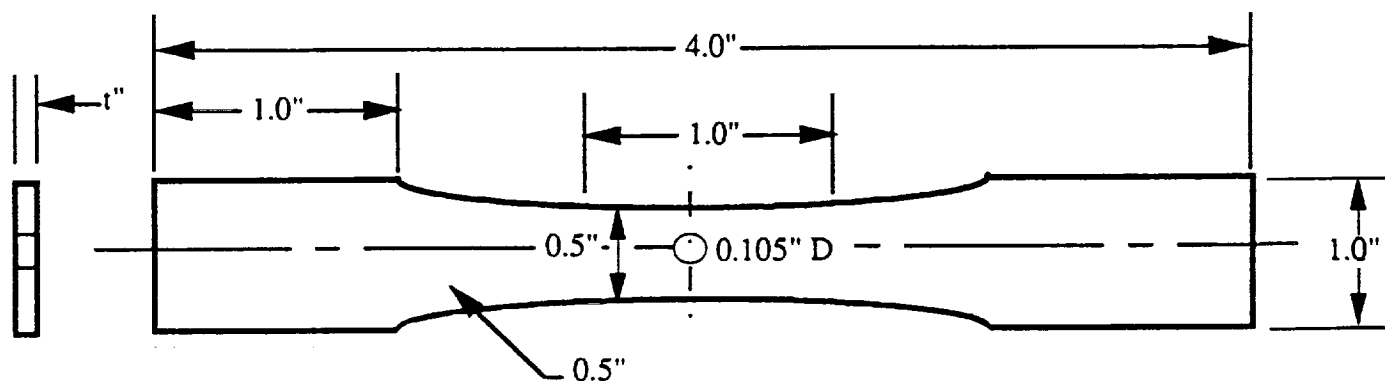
Tensile Test Coupons - Smooth ($K_T = 1.0$) with no Center hole - Notched ($K_T = 2.5$) with Center Drill-hole.
